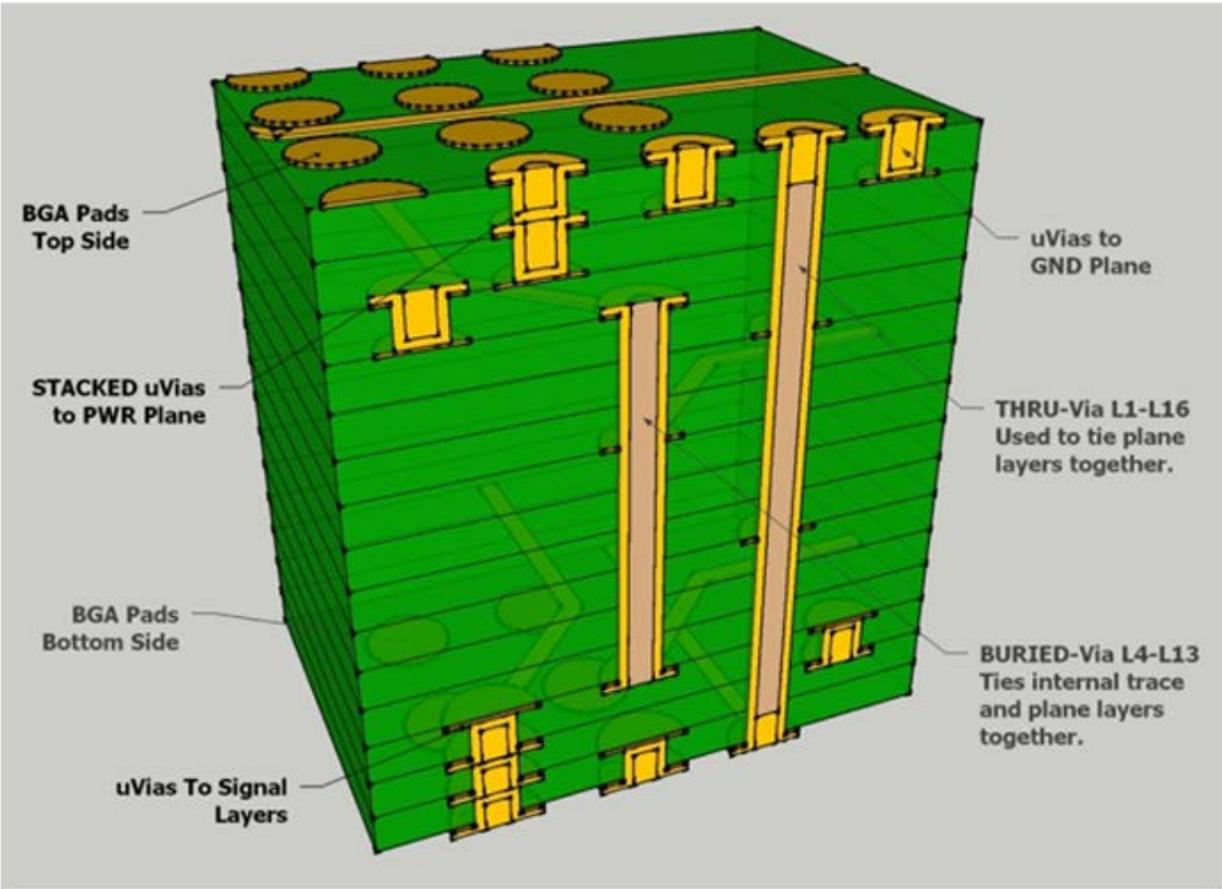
Typical construction of an HDI PCB stack-up. Image depicts a 16 layer PCB. From [Optimum D. A.-17].
